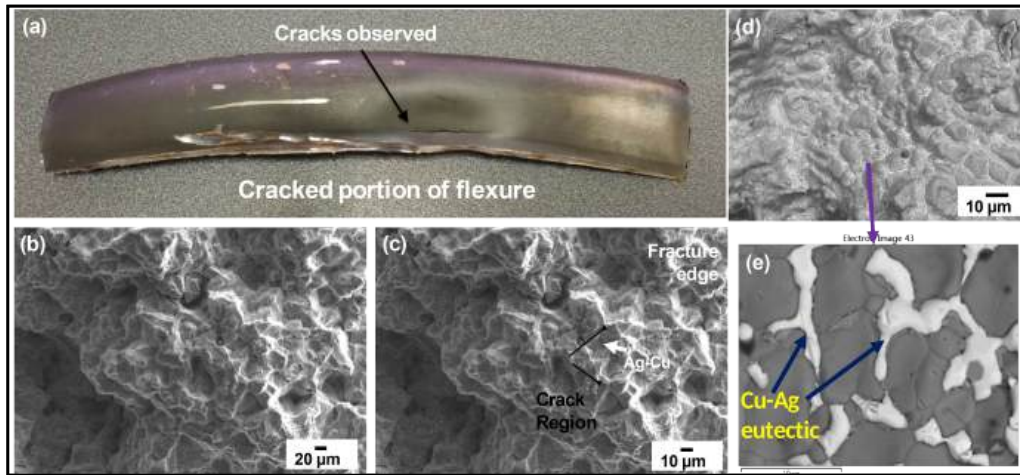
(a) Failed flexure during brazing b) Fractograph of cracked portion of flexure c) SEM images of intergranular cracks at fracture d) & e) Fractograph of TMS tested sample.
